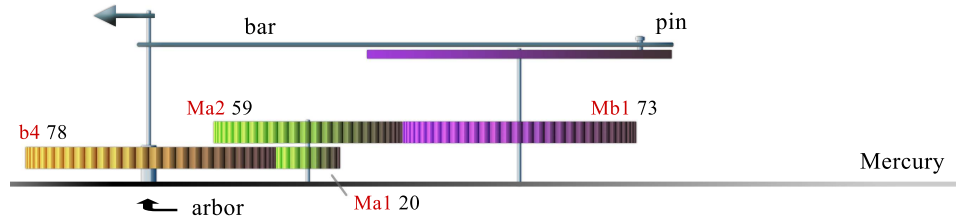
Side view of the optimized gearing schematic diagram of the Mercury epicycle gear train, starting with a 78-teeth fixed gear instead of a 32-teeth gear. Further properties are equal to Figure 7.12.
